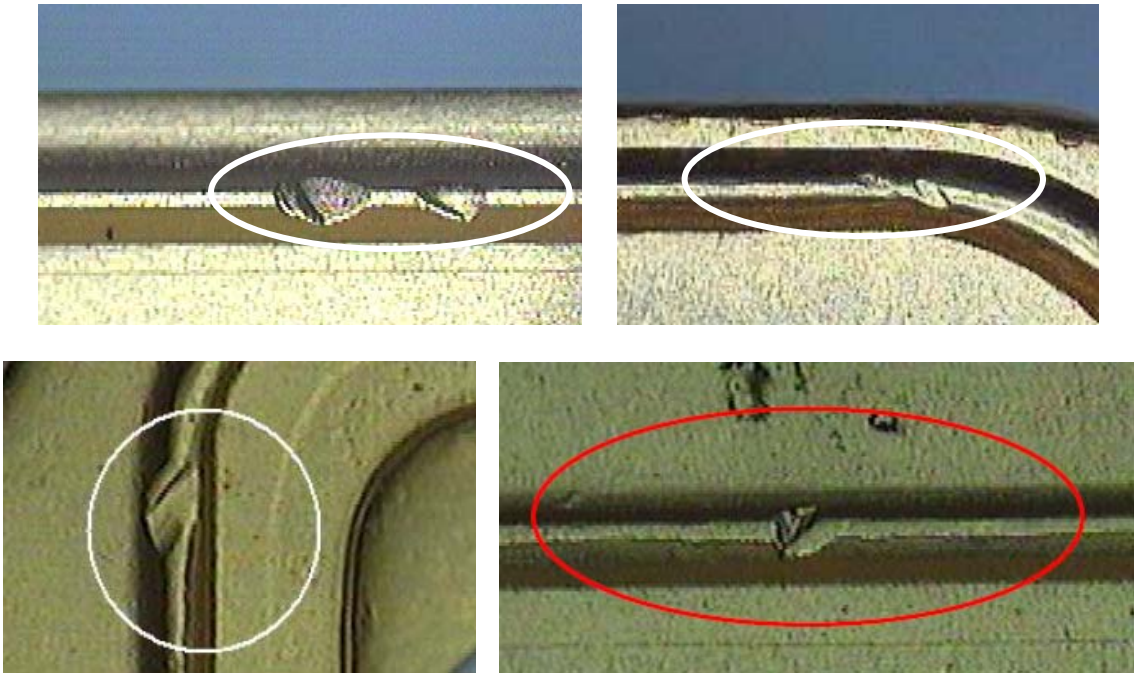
Nicks, pits, voids, indentations, on projection-weld package critical seal areas
